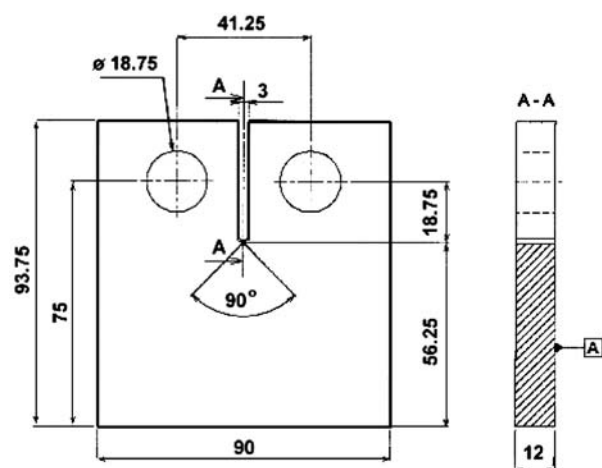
Scheme and dimensions of CT specimen used for FCG measurement
